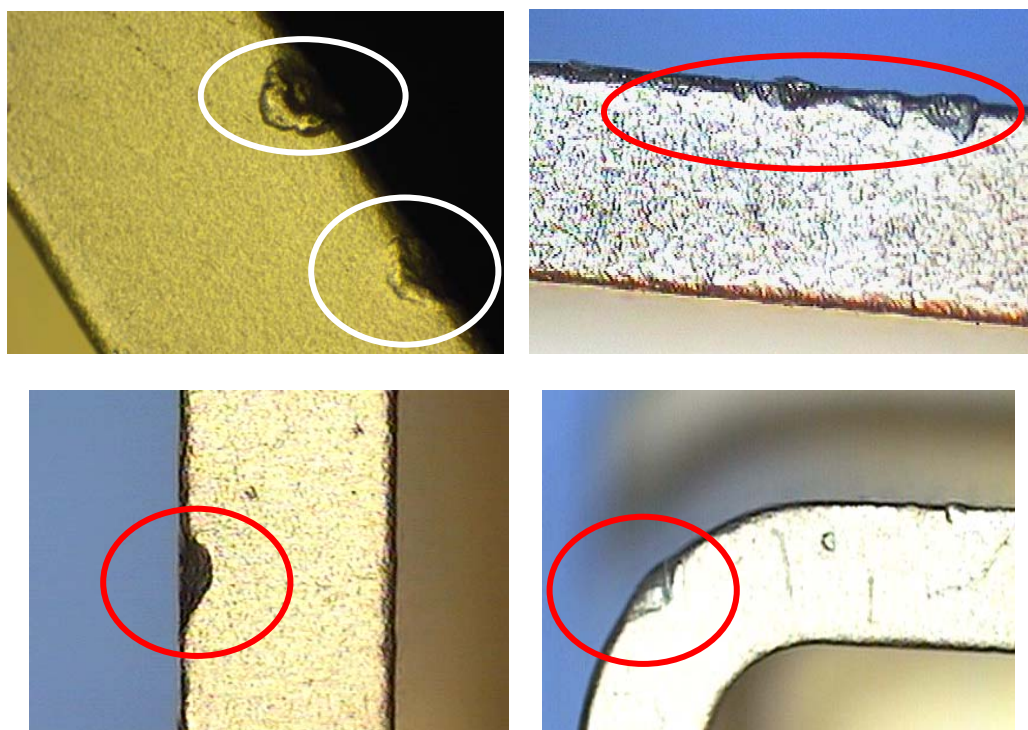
Nicks, pits, voids, and indentations on seam-weld package critical seal areas
